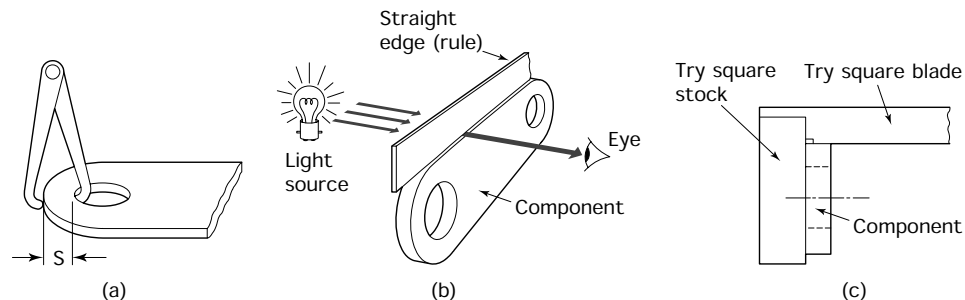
Link: checking profile: checking end radii – knowing the hole diameters, the end radii can be checked with outside calipers using the formula $S = R - \frac{1}{2}D$, where S = caliper setting, R = end radius and D = hole diameter; (b) checking straight lines – light will be visible between straight edge and component where any hollows exist in the profile of the component; (c) checking edges for perpendicularity (also check against light source as in (b))
